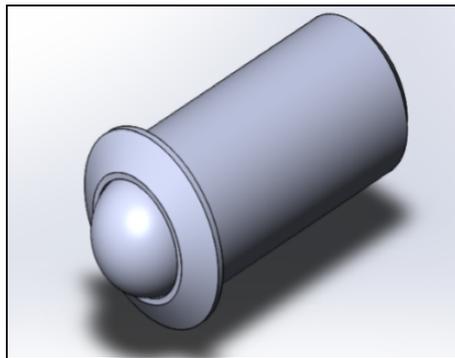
3D CAD model of the spring loaded ball pin.
